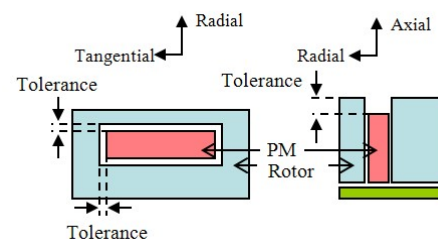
Position tolerances between the rotor and the permanent magnet
